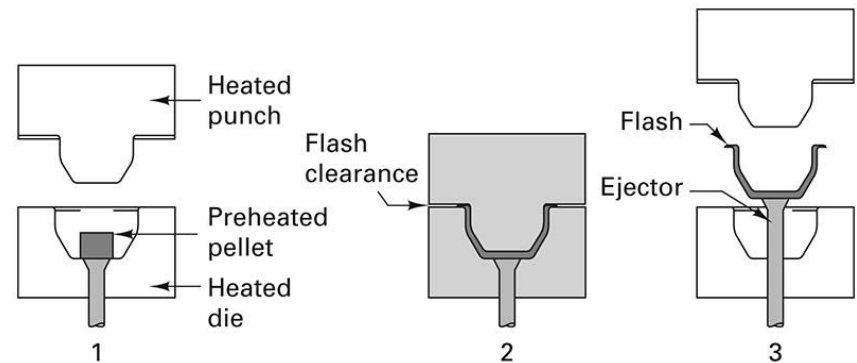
The hot-compression molding process: (1) solid granules or a preform pellet is placed in a heated die; (2) a heated punch descends and applies pressure; and (3) after curing (thermosets) or cooling (thermoplastics), the mold is opened and the part is removed.
